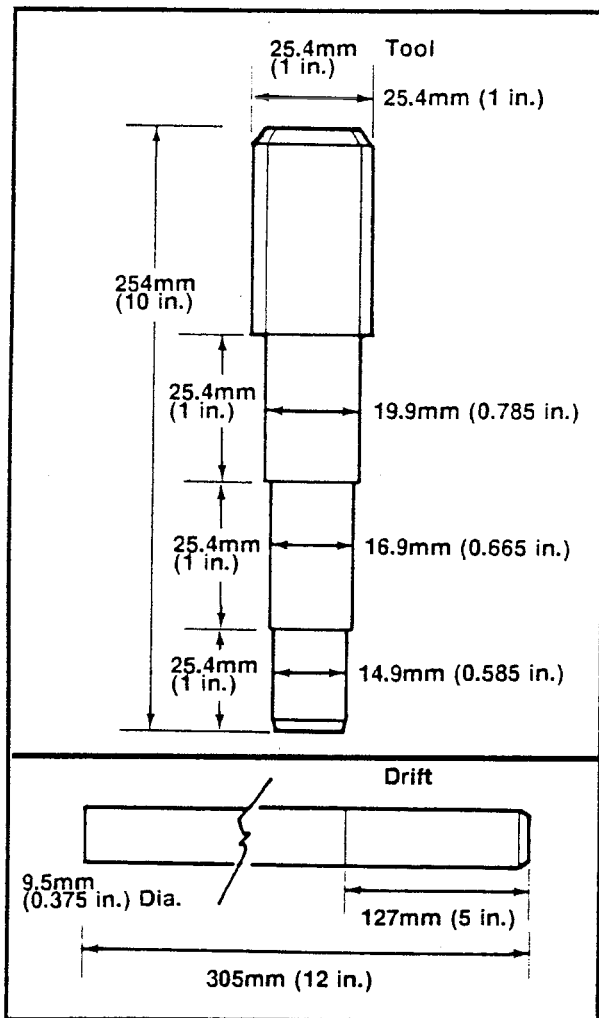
Fabricated Wheel Hub Bearing Removal/Installation Tool
